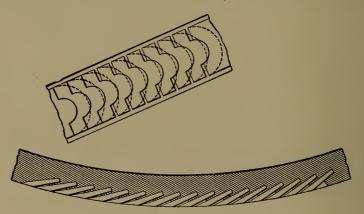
Milled Buckets in Riedler-Stumpf Turbine
